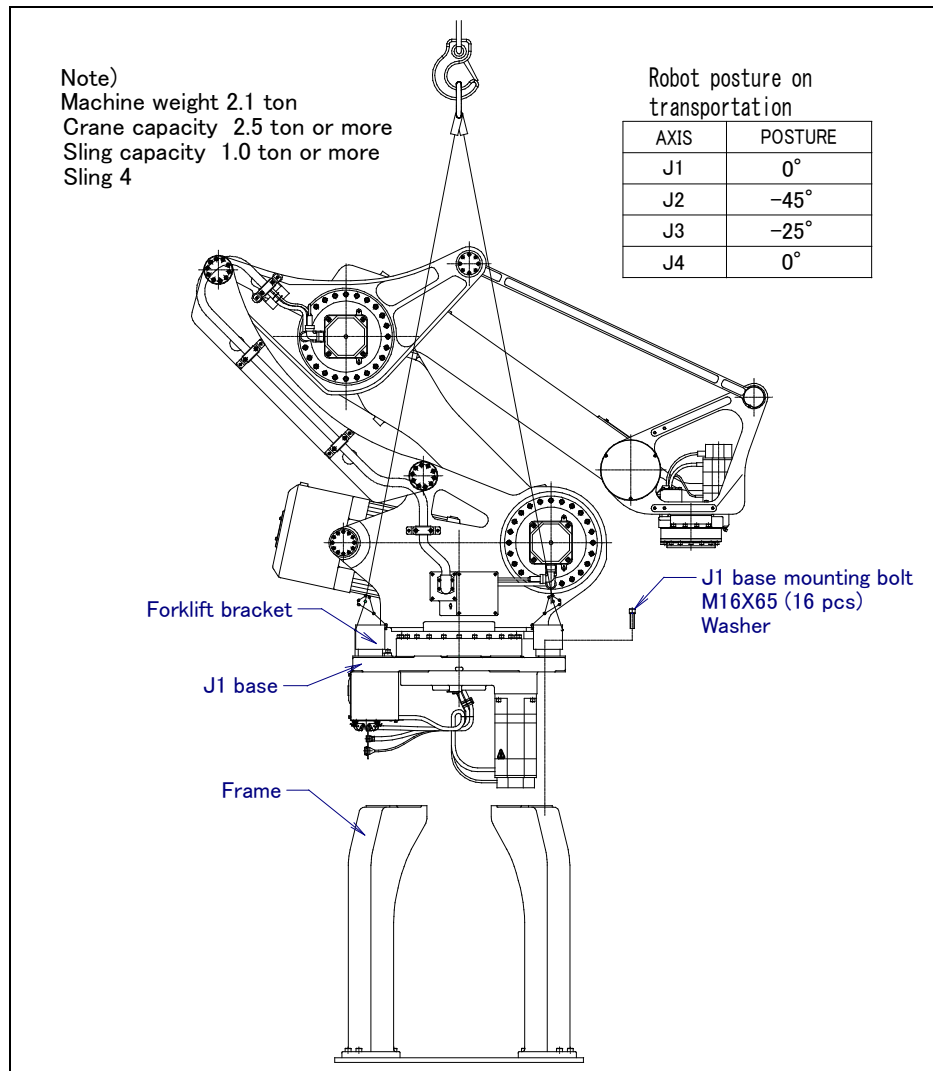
(d) How to remove the pedestal (robot with a separate controller)
